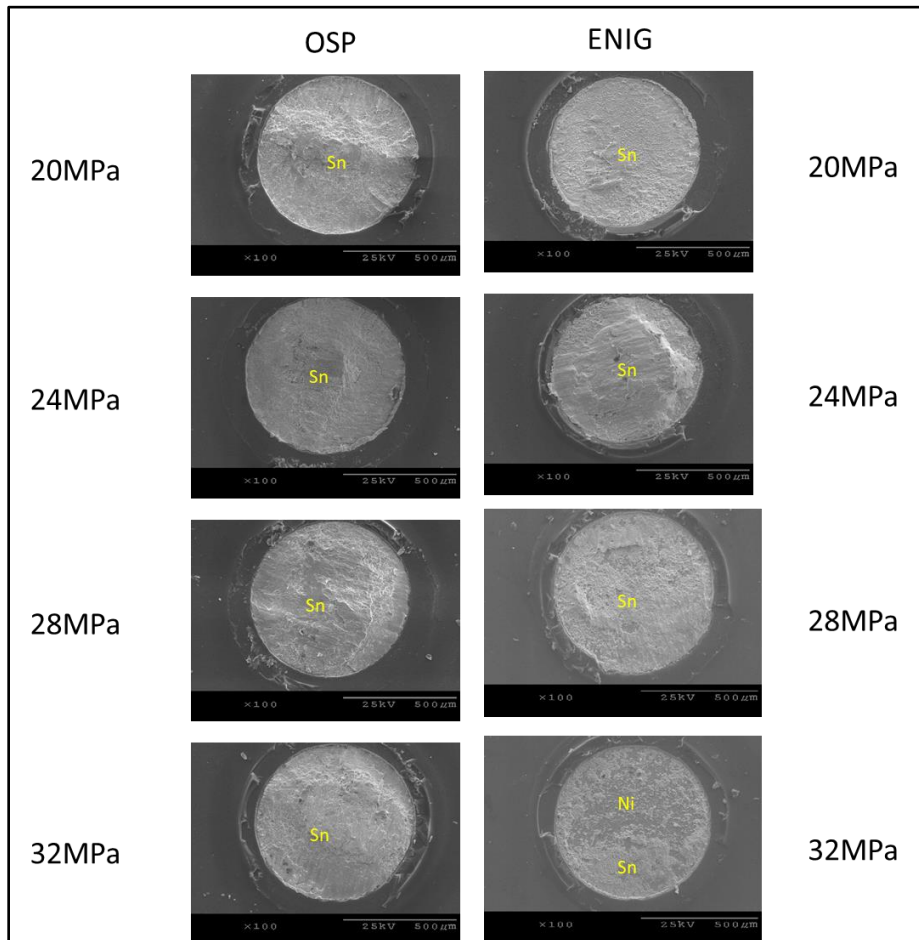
Fractured surface of SAC305 with OSP and ENIG surface finish
